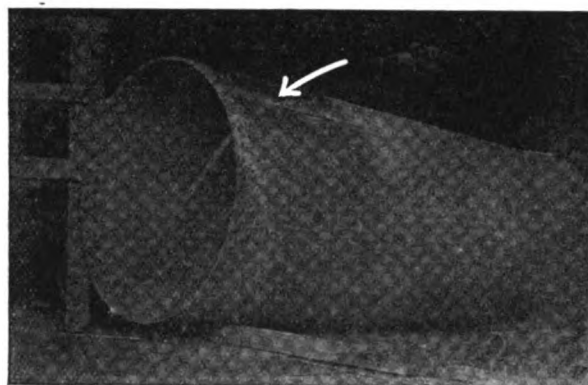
Long, vertical seam in boiler plate construction made by arc welding
